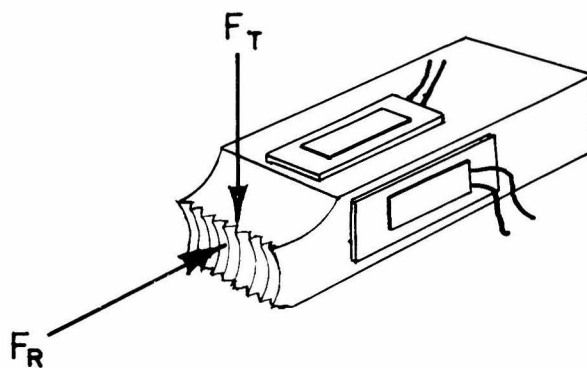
THREADING CHASER WITH SR-4 STRAIN GAGES ATTACHED.
